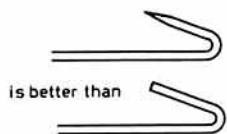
G8CGK POINTS OUT THAT HIS PAPER-CLIP COMPONENT-PULLER CAN BE IMPROVED BY FILING THE HOOK TO FORM A SCREWDRIVER SHAPE.
